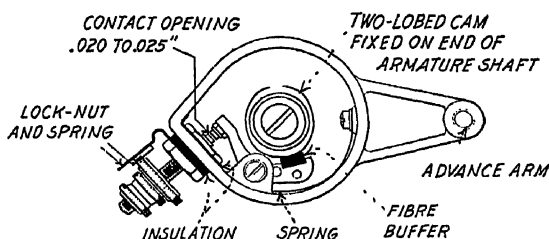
Typical breaker and cam arrangement on low-tension magneto (Remy)
